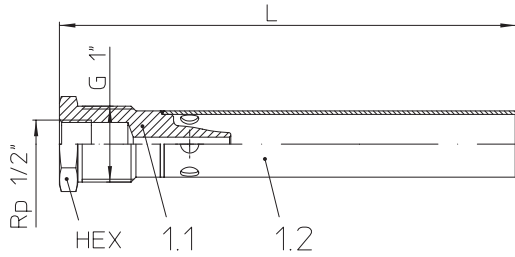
2 with Internal thread (Rp 1/2) and External thread (R 1)
